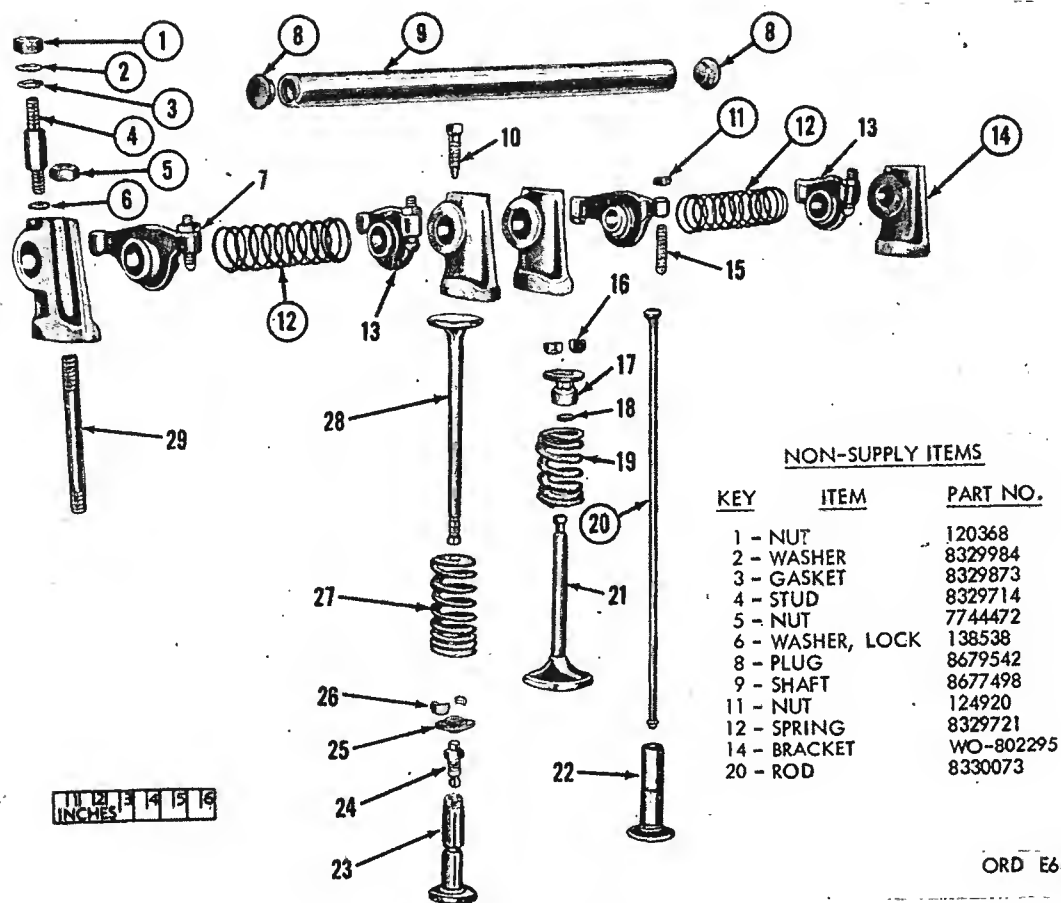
Valve springs, rocker arms and related parts—exploded view.
